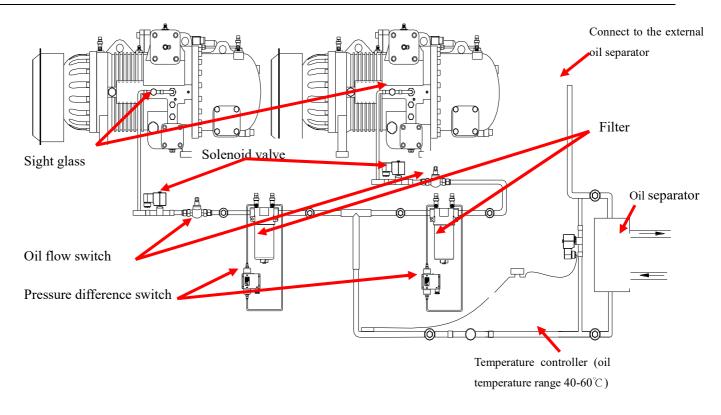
LB-100~280-PLUS Piping drawing of external oil cooling type oil circuit
